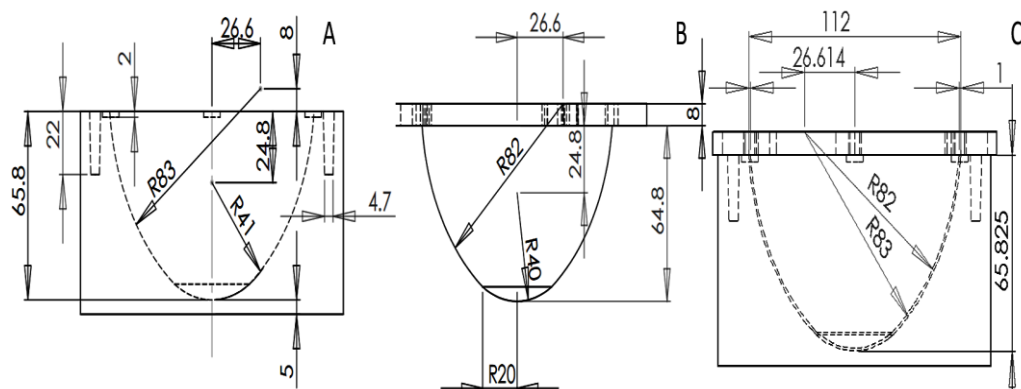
Drawings of phantom mould (A) cavity, (B) core and (C) complete assembly showing 1mm gap between cavity and core
